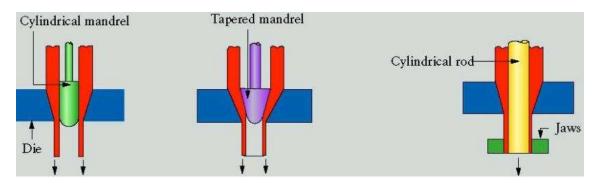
Showing methods of tube drawing (Kalpakjian, 2003)
